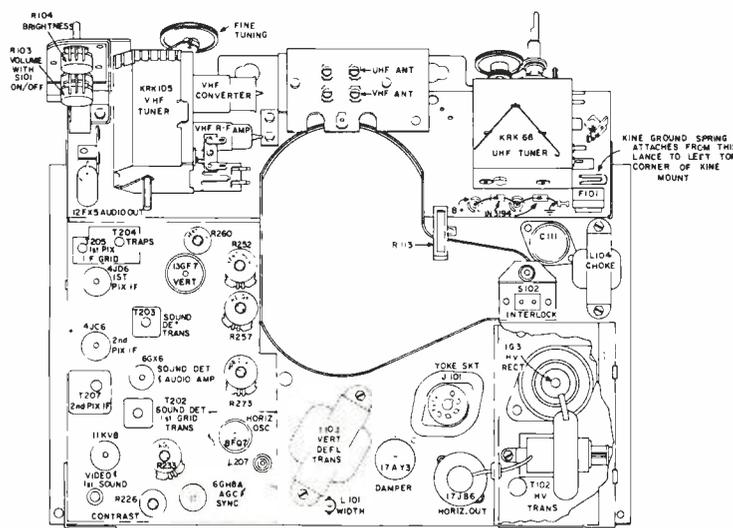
Rear view of KCS146, 270-volt receiver layout.
